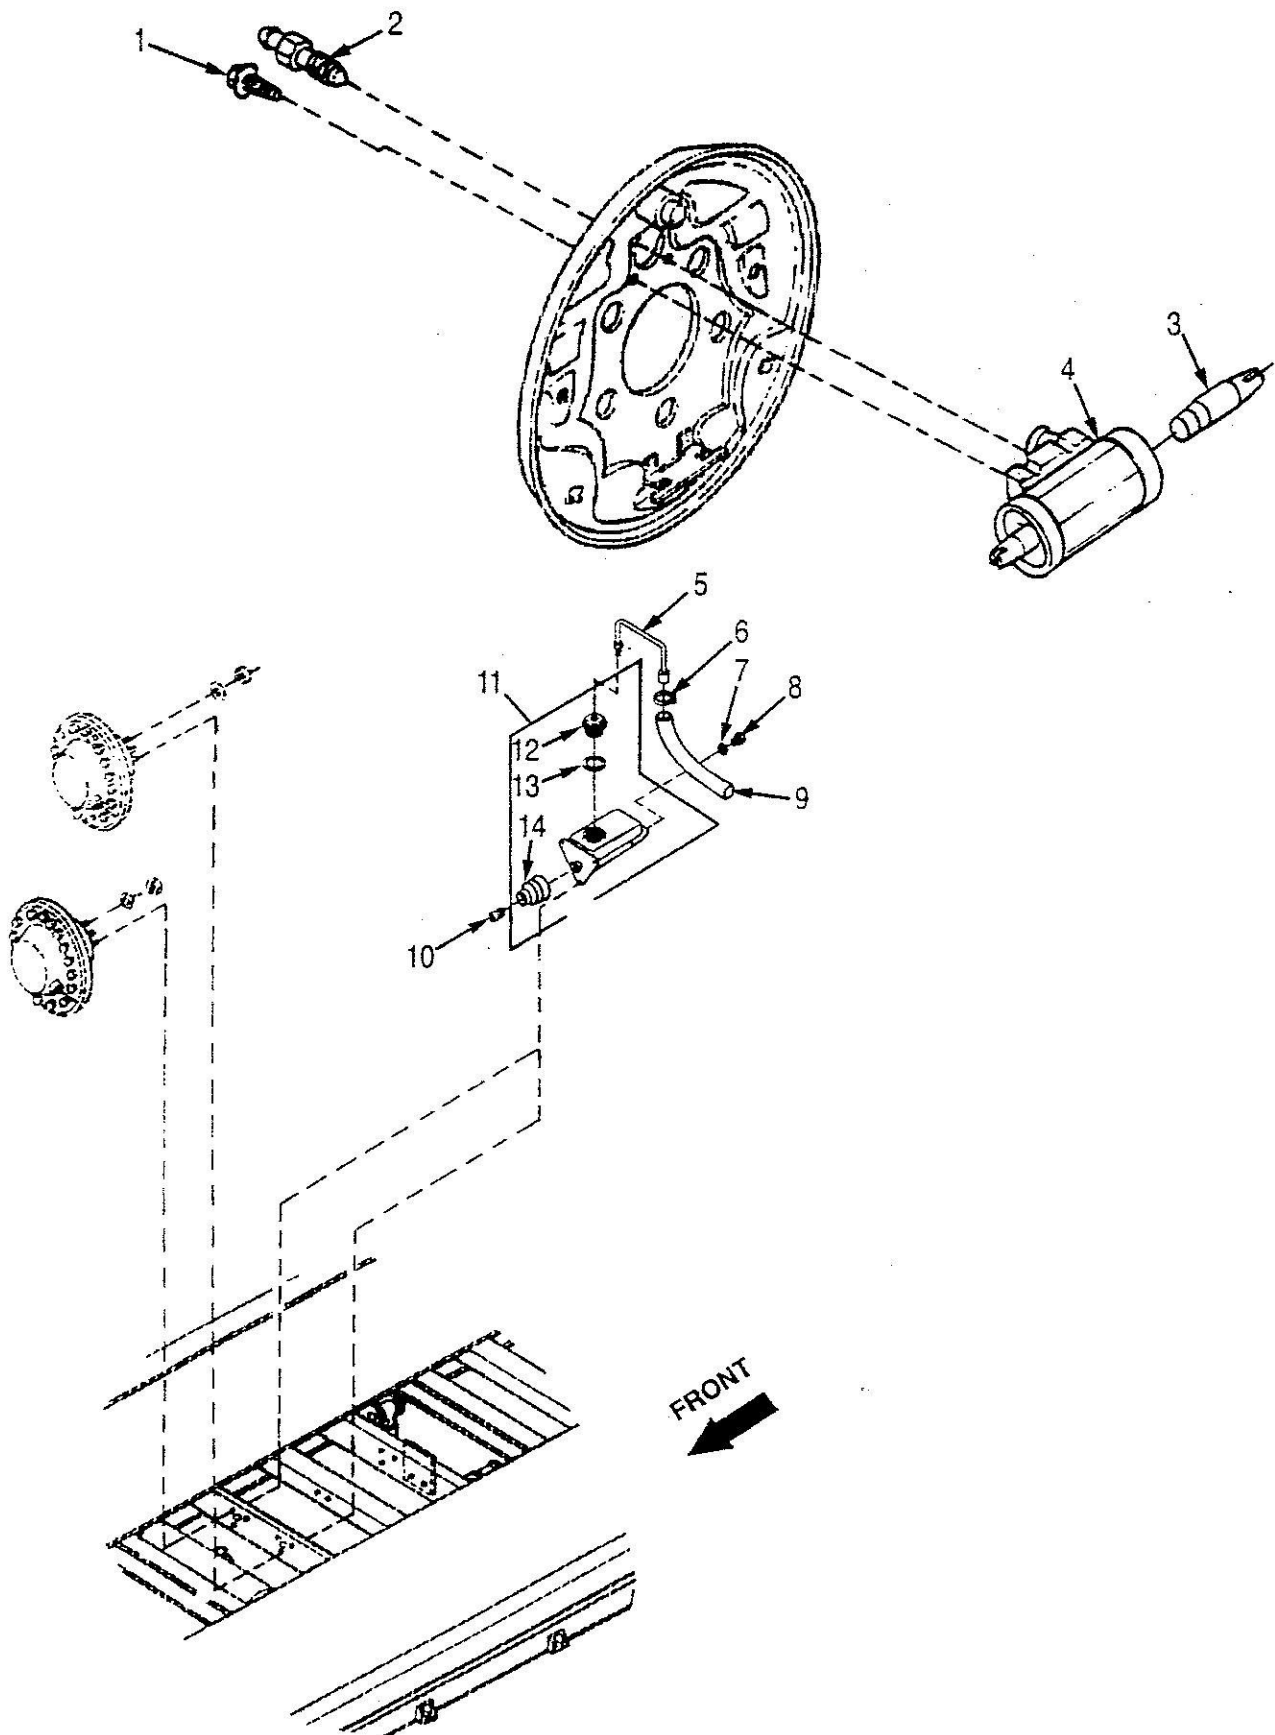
Master Cylinder and Wheel Cylinder Assemblies
